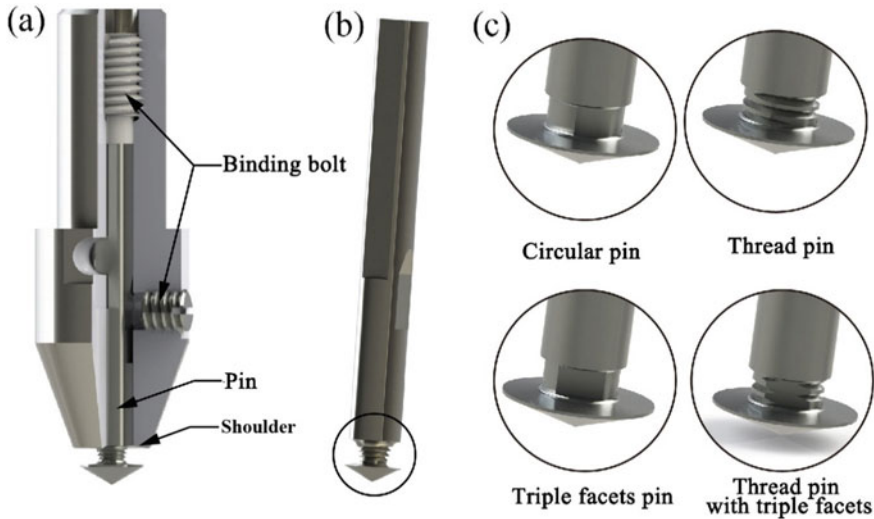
Schematics of a detachable welding tool, b macroscopic rotating pin and c different rotating pin morphologies
